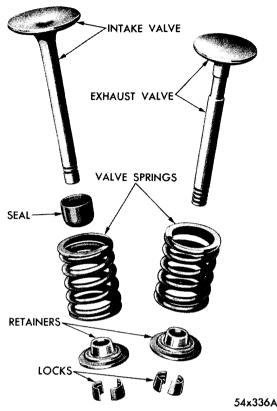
Valves, Springs, Seals, Retainers and Locks (Disassembled View)
